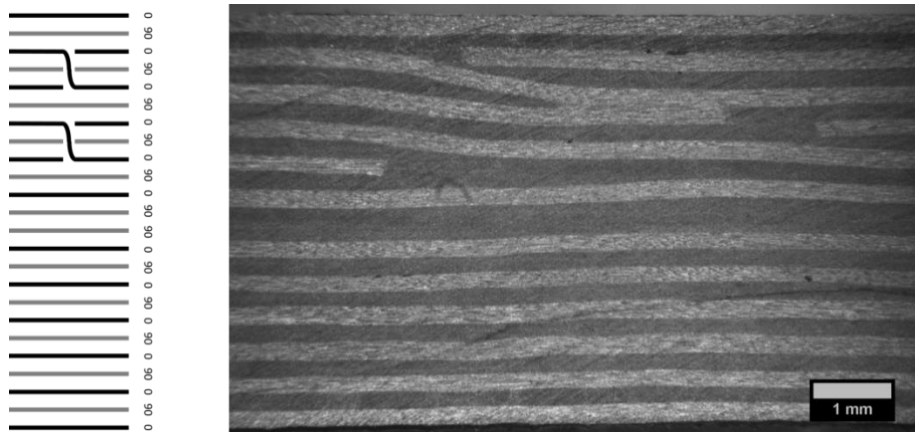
CFRP sample lay-up with embedded defect, thickness view
